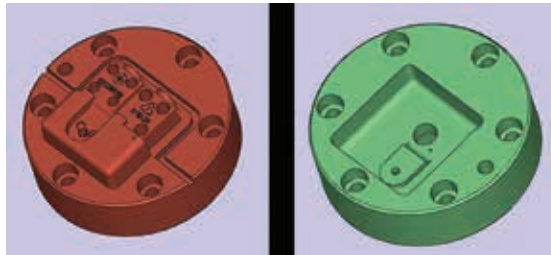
Core (left) and cavity (right) inserts. The six holes on the periphery are intended to receive standard bolts to secure the printed inserts into a mold base
